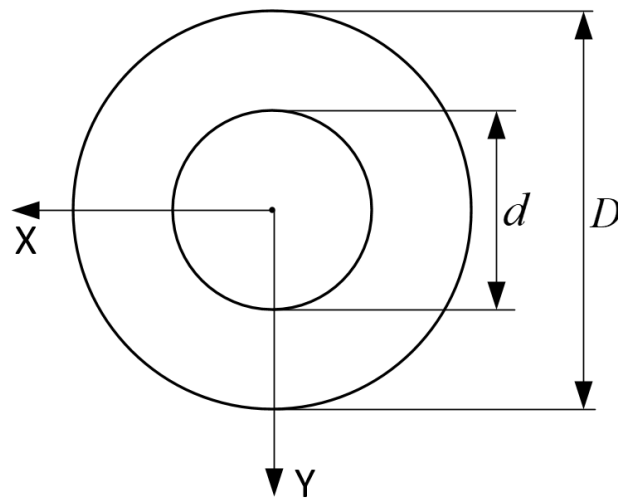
A cross-section of the multi-diameter hollow slender shaft
